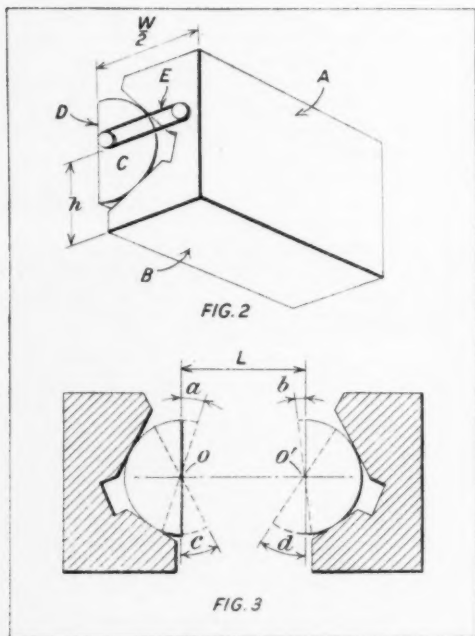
A Perspective View of a Micyl Block which has been Specially Developed for Checking Tapers
